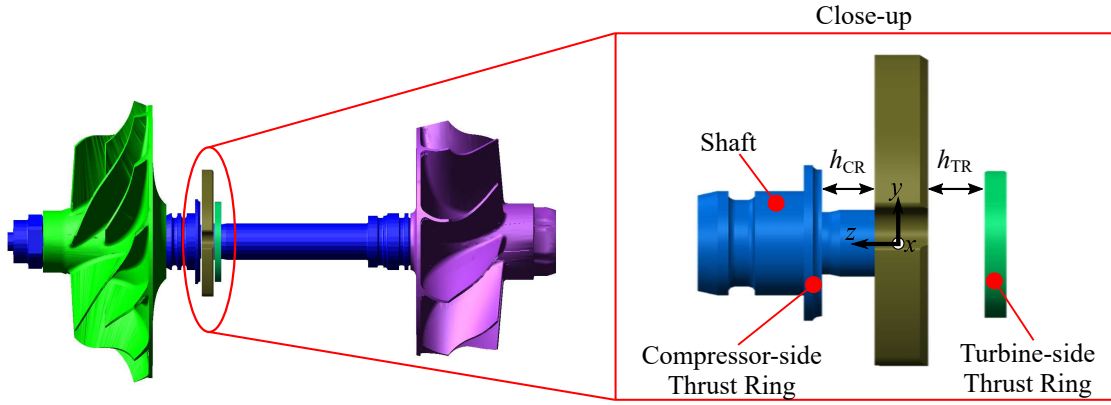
Turbocharger rotor and close-up of the thrust bearing and the thrust rings
